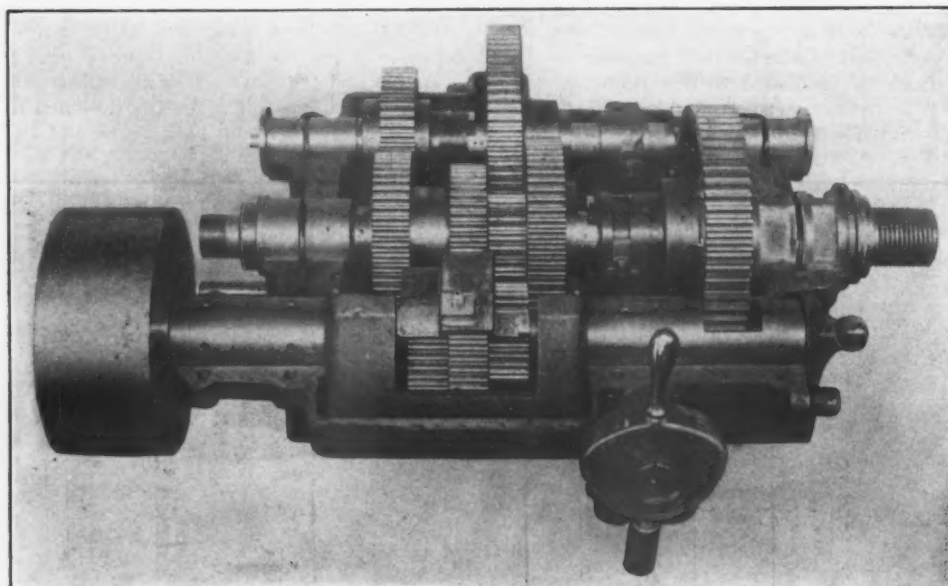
The Headstock with Cover Removed, Showing the New All-Geared Drive.
